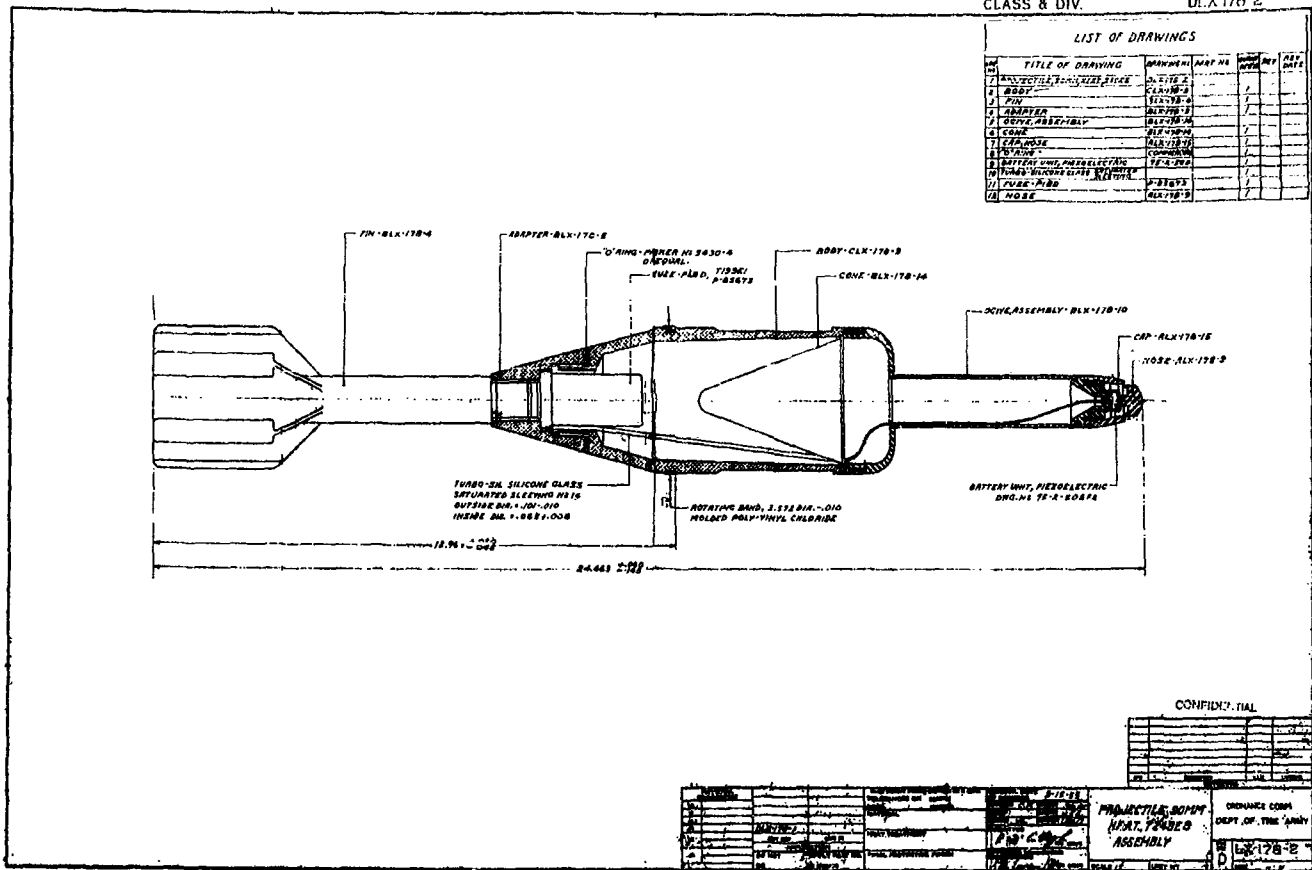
Assembly, 90 mm. T249E8 Projectile.
